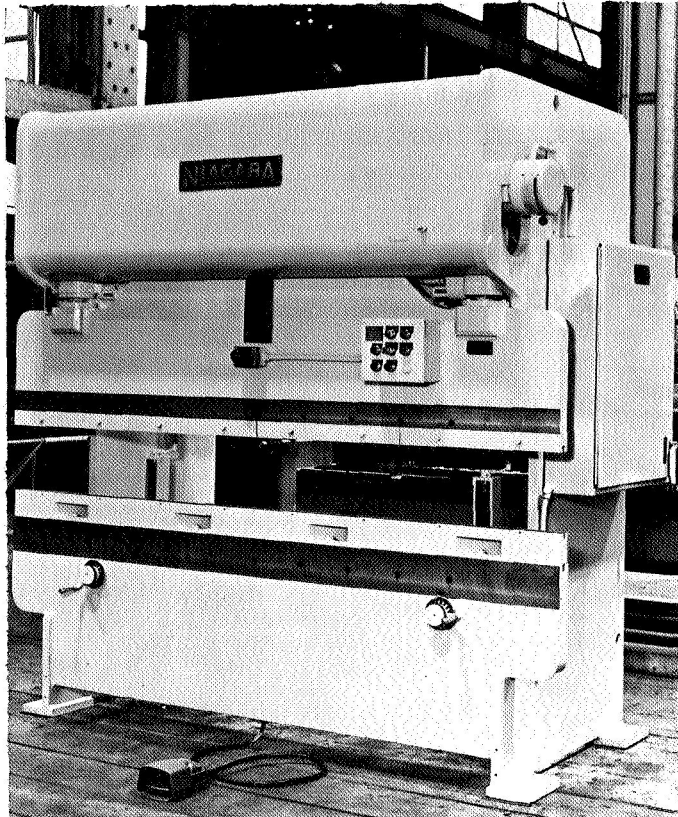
60-TON MECHANICAL PRESS BRAKE
